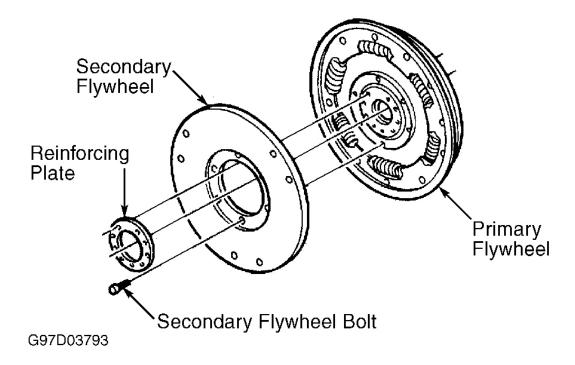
Identifying Dual Mass Flywheel Components (Excursion & F250-F550 Super Duty With M/T) Courtesy of FORD MOTOR CO.
